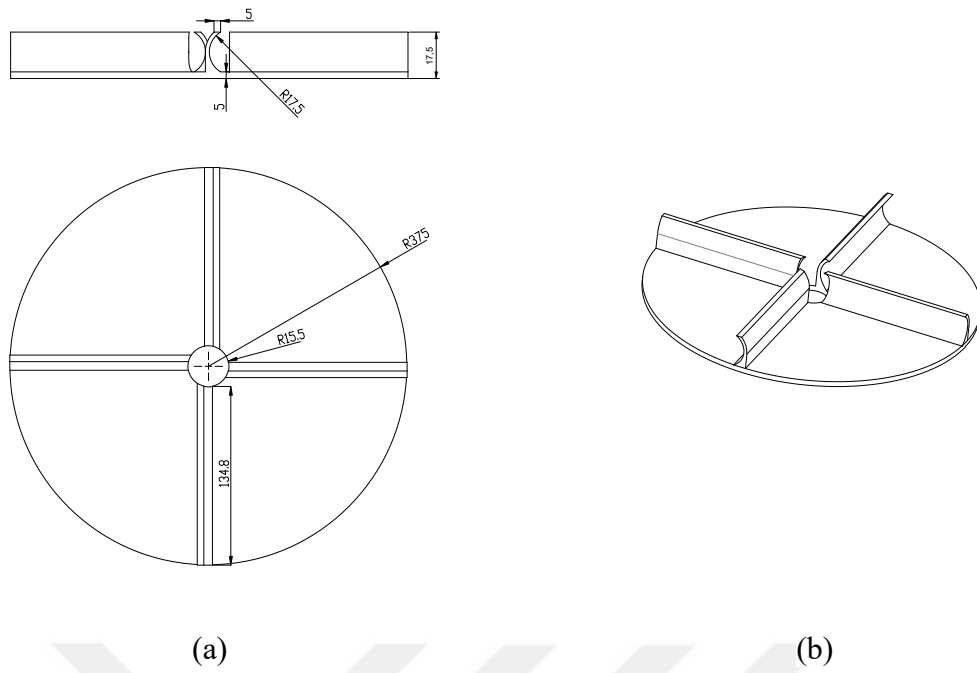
C profile shape of vane on the disc. (a) Front and top views; (b) Isometric view
